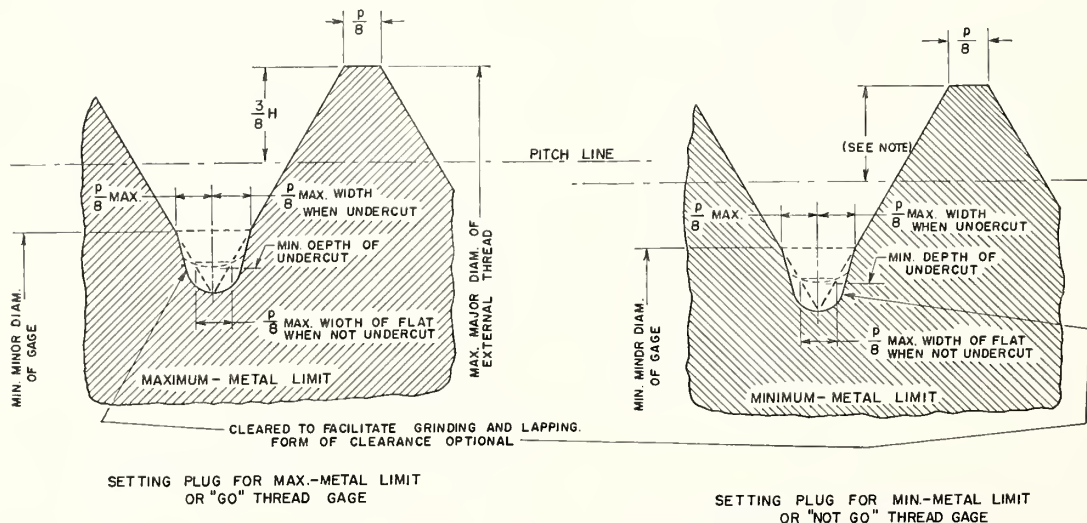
Thread form of basic-crest thread setting plug gages.
